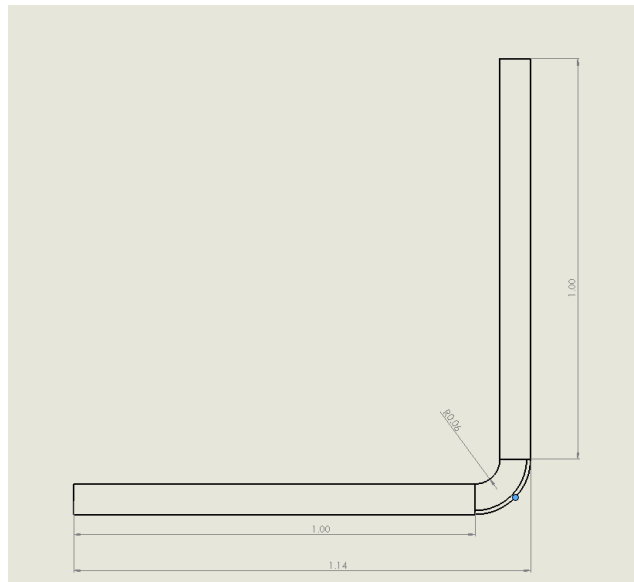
(b) 90 Degree Bend Pipe Dimension
